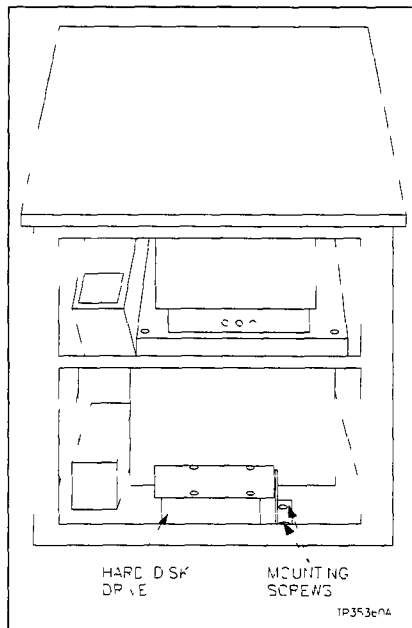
6 Hard Disk Drive Removal for IIOIS20
